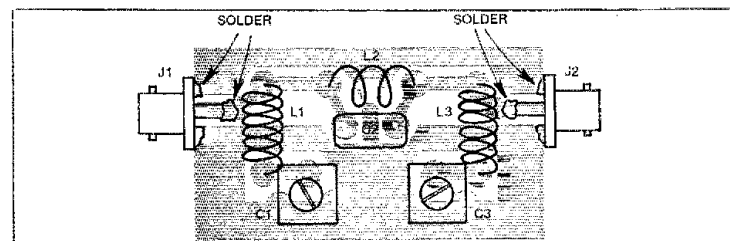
Parts-placement guide for the filter. The shaded area represents an X-ray view of the copper pattern. The two BNC connectors are each soldered to the board in three places as shown.
